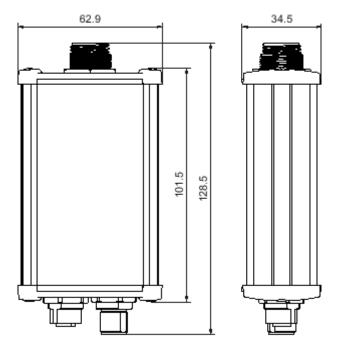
Dimension drawing of the PC adapter for SIMATIC RF-DIAG (all dimensions in mm)
